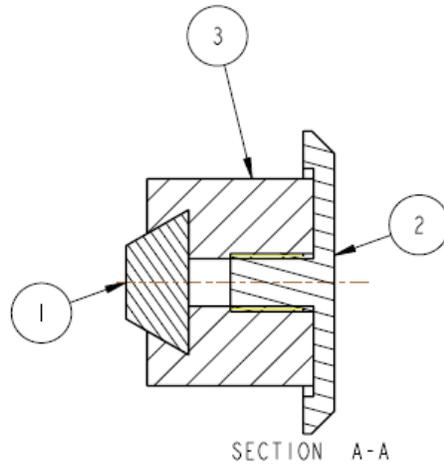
Viton stop cross-sectional drawing (D080241)
